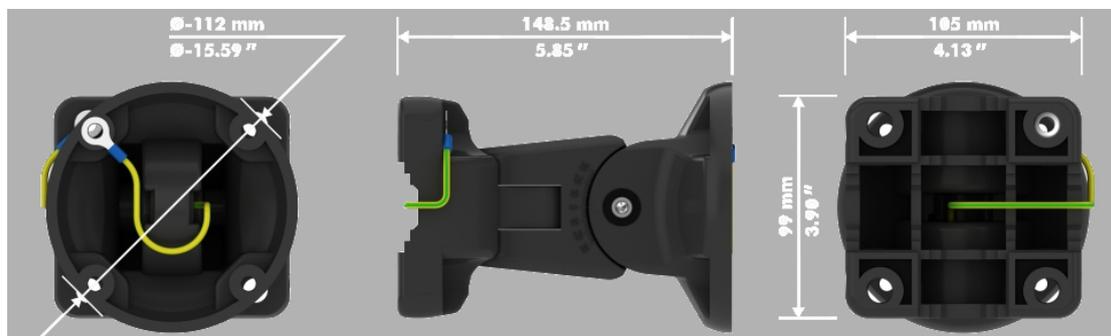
mast mount to install the sensor to a mast or directly to a wall.
